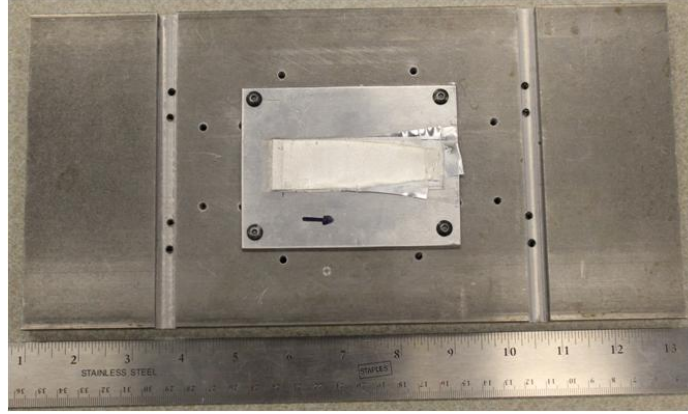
Fixture used to clamp welding plates to UAM machine: Al 3003-H18 plate bolted to steel base plate
